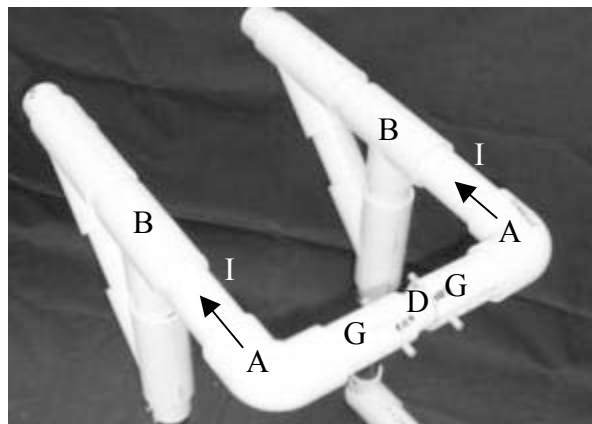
Step 20 – Joining Side Frame and Rear Frame.
